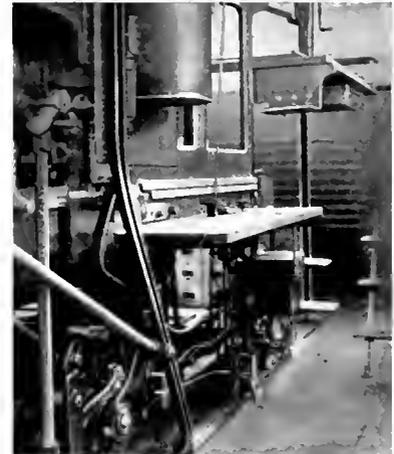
Device for Opening Motor Circuit When Paper Fails to Feed Properly
